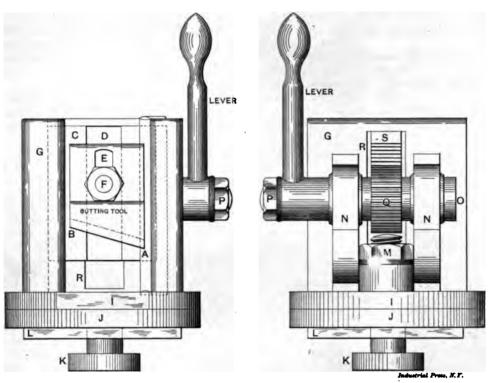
Front and Back Views of Special Turret Lathe Fixture.
